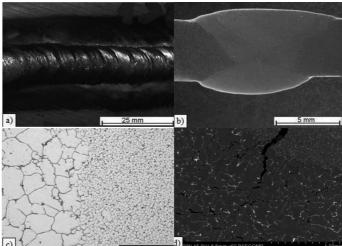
QE22 alloy joint (I = 120 A, El = 3.0 kJ/cm): a) weld face, b) macrostructure of two-sided butt joint – correct joint condition, as-cast, c) refinement of microstructure in the weld fusion line, as-cast condition, LM d) hot crack in weld and network of cracks in HAZ, SEM
